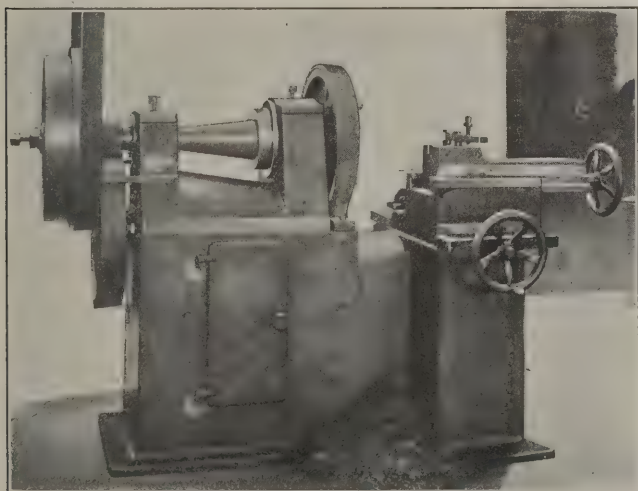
Ring Turning Lathe for Dressing the Oil Grinder Rings
